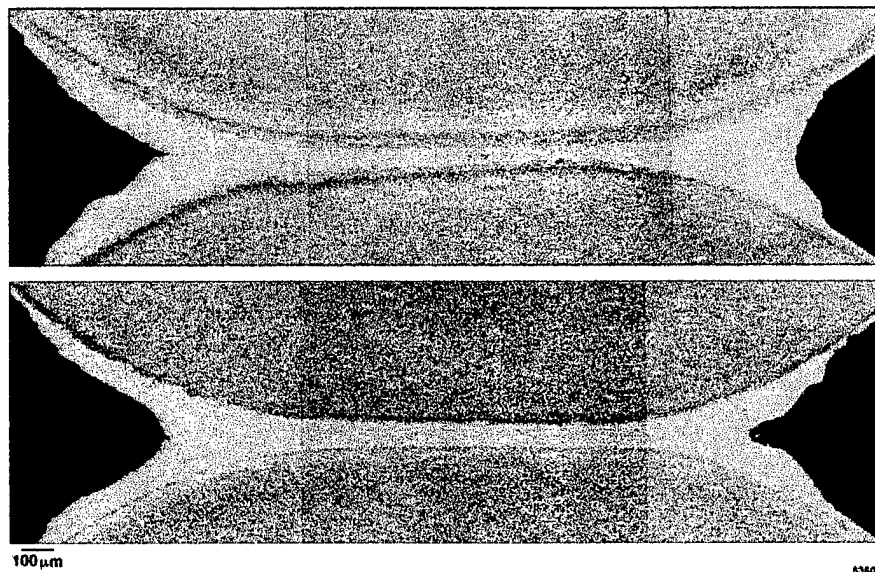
Typical PWA 1177 Tube-to-Tube Braze Joint; A Small Braze Fillet and Minimal Braze Tube Reaction Will Maximize Tube Chamber Performance and Maintain Structural Integrity
